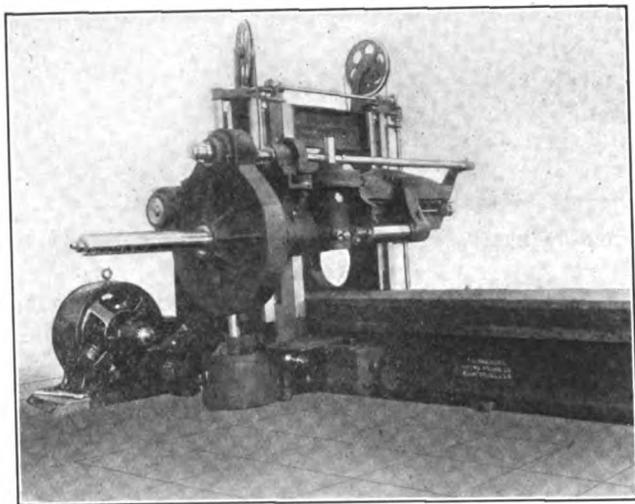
MILLING MACHINE WITH DIRECT-CURRENT MOTOR.
